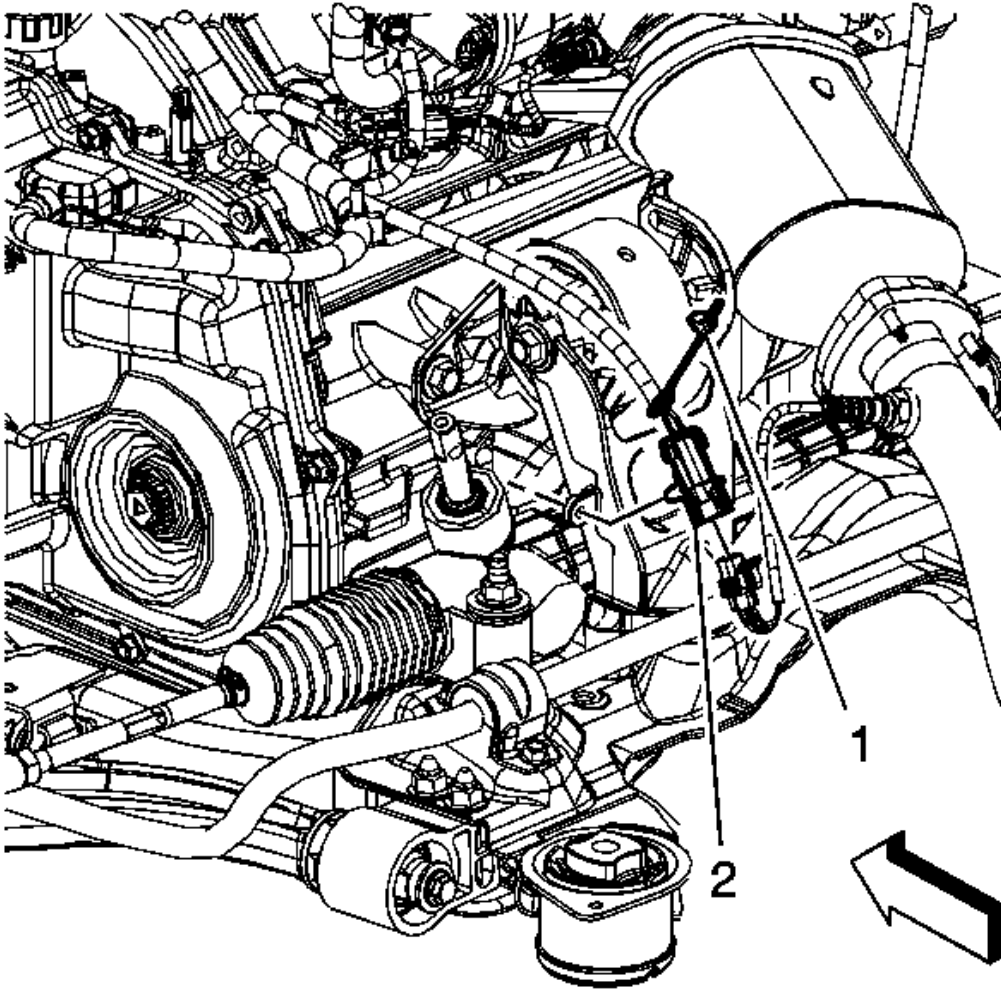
Identifying CPA Retainer & HO2S Electrical Connector (Bank 1 Sensor 2)
